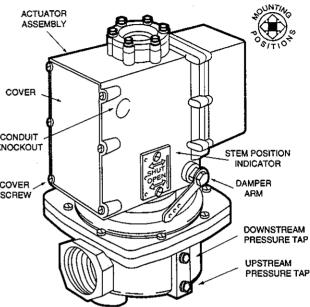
AH2B Actuator (shown mounted on V710 gas valve)
